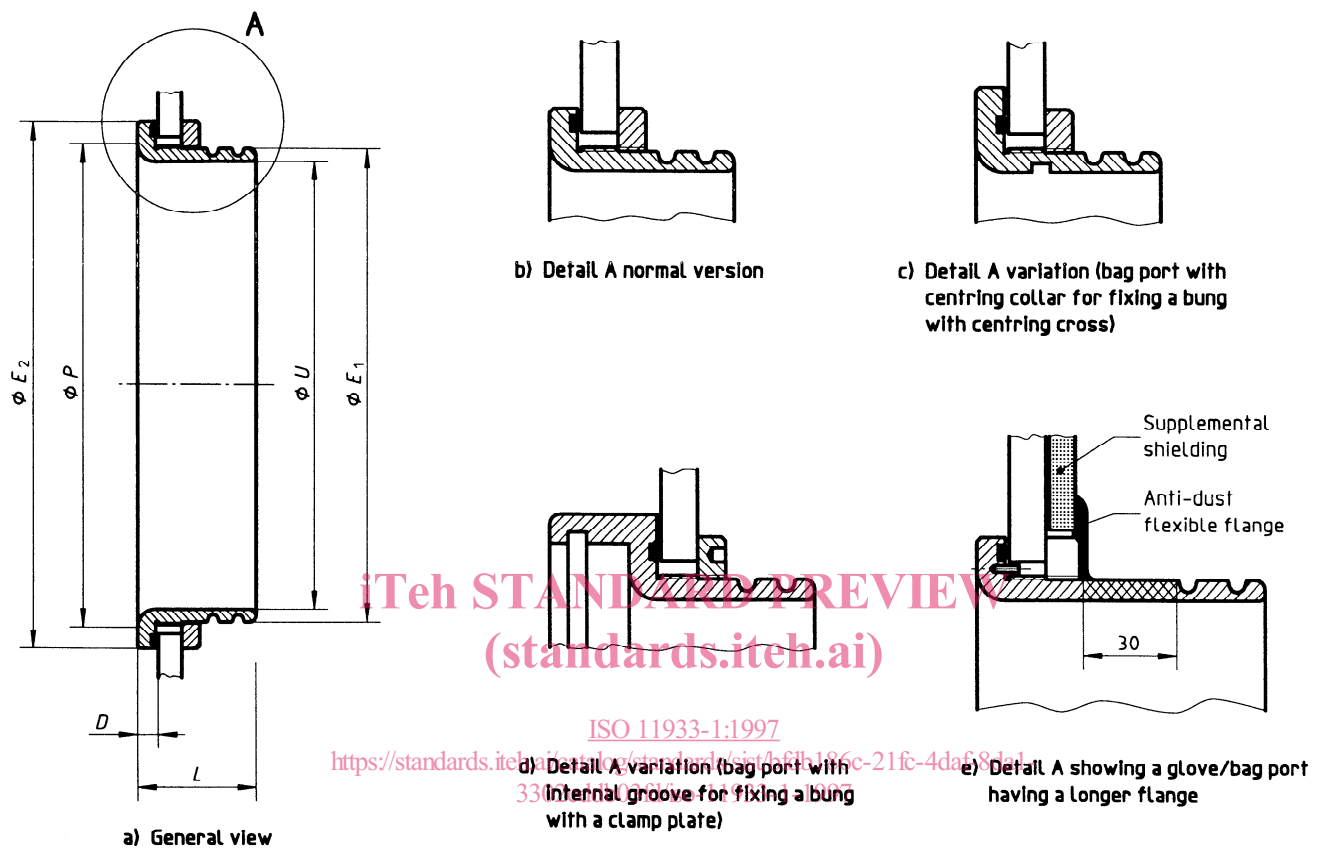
Examples and dimensions of threaded glove/bag ports having two external grooves
